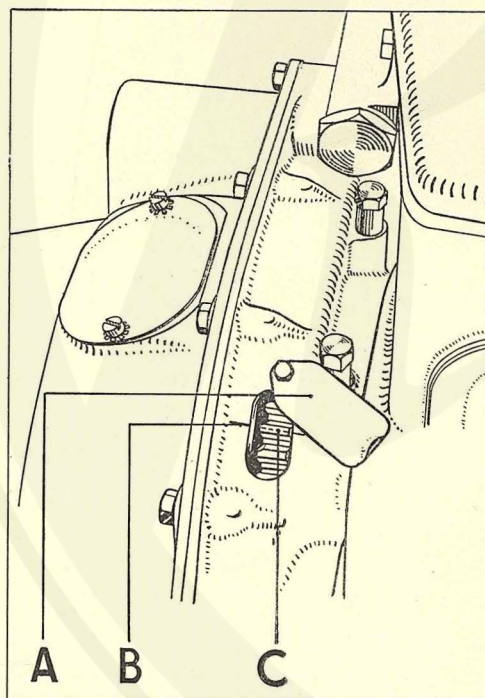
A, cover ; B, line on casting ; C, punch marks on starter ring tooth.
